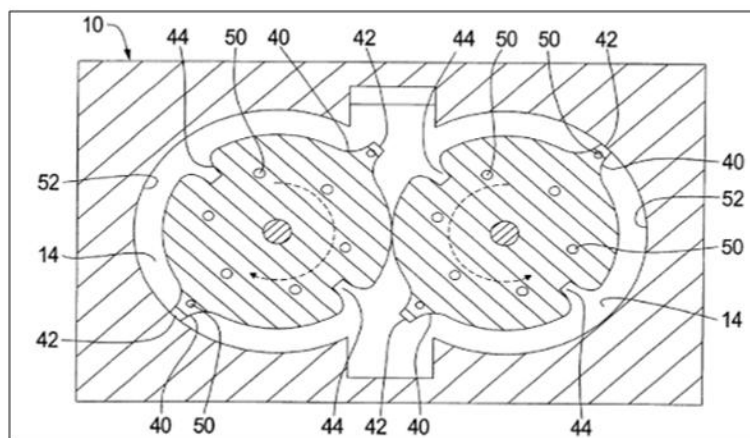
Rotary engine with tongue and groove cylindrical rotors[13]
